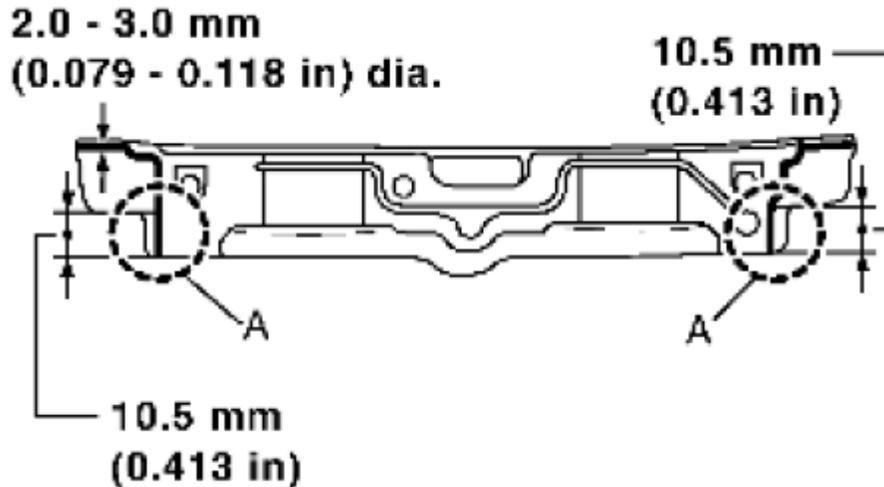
Identifying Liquid Gasket Applying Specification On Camshaft Bracket (No. 1)
